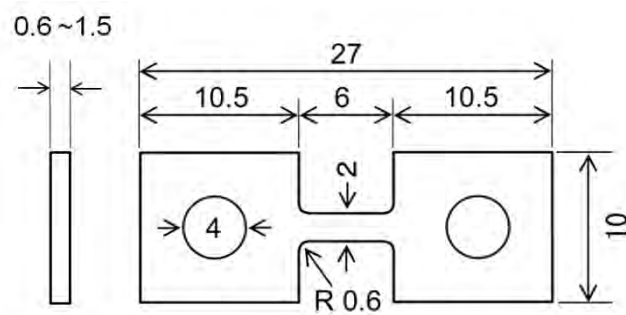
Schematic drawing of the tensile specimen used for the load-sensing block type tensile equipment.
